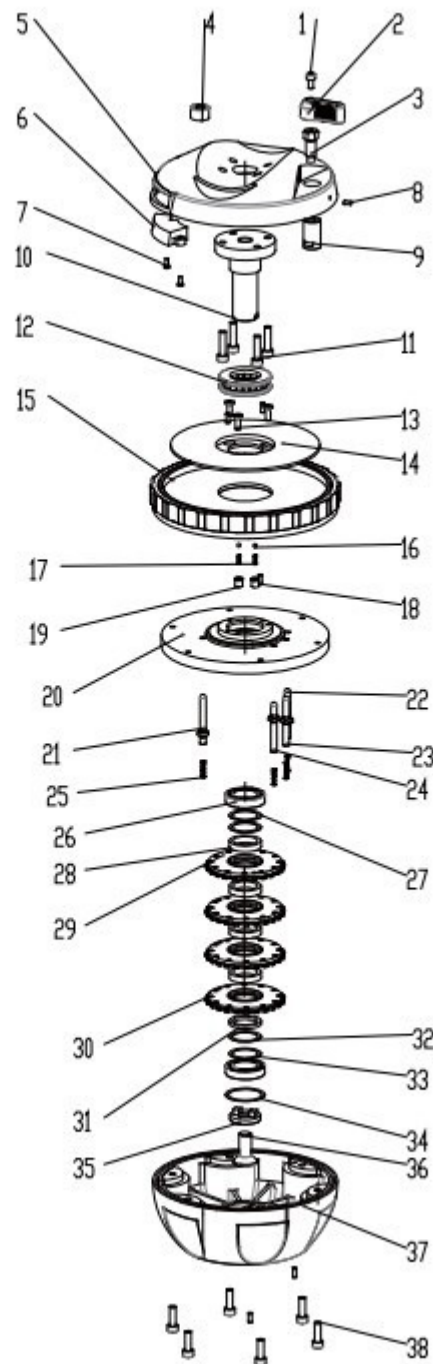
REACH PLUS 5 Fluid Head—Pan Unit Assembly -Pan Drag
